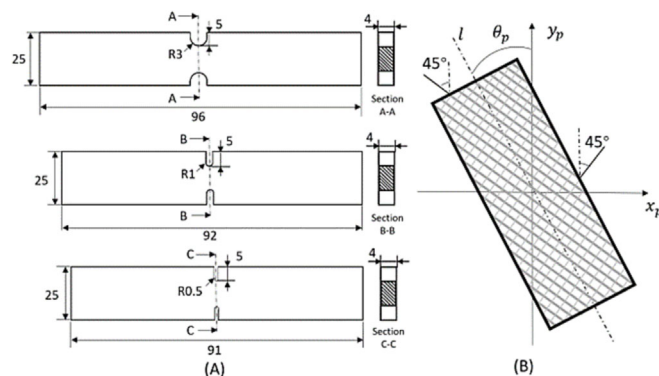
(A) Technical drawings of 3D-printed specimens with three different dimensions and (B) manufacturing angle between the longitudinal axis and the main printing direction.³¹ [Colour figure can be viewed at wileyonlinelibrary.com]
